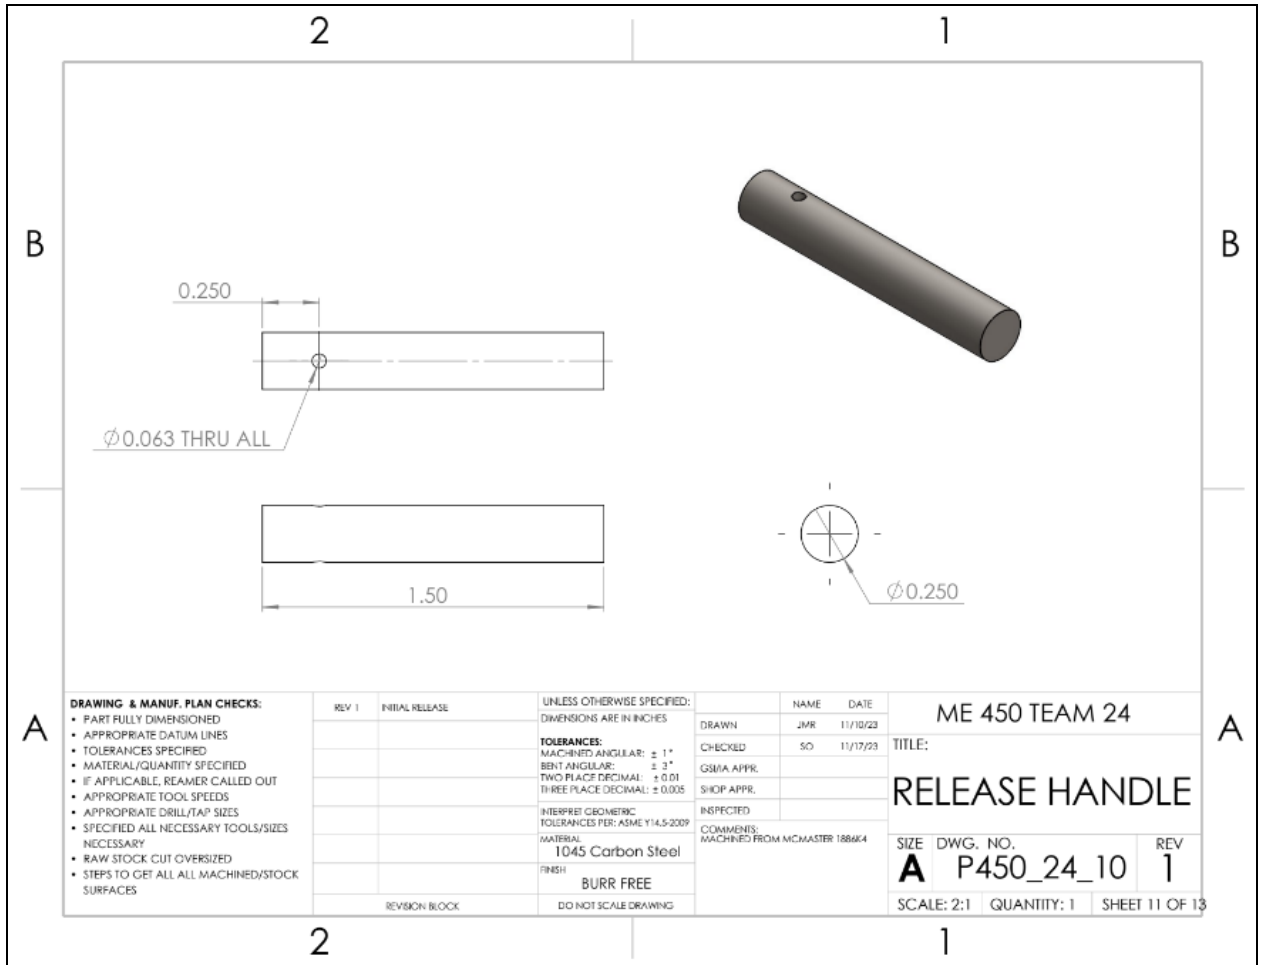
Manufacturing drawing for the release handle component of the beta design.
